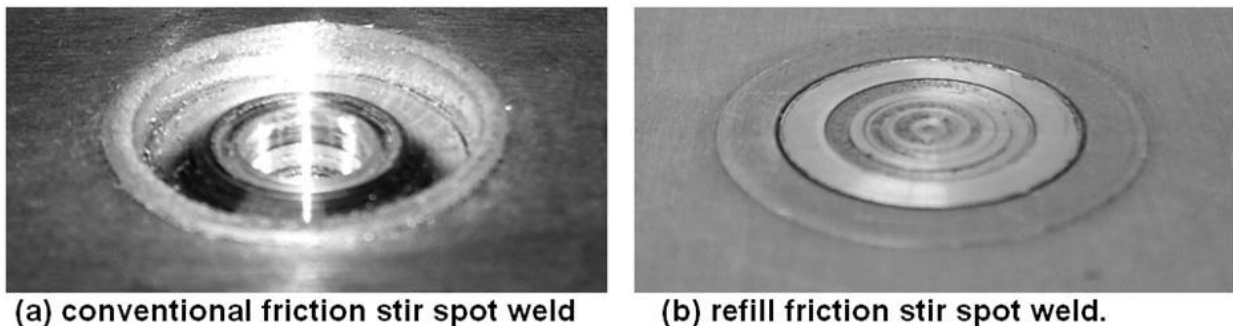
Comparison of the weld surface from conventional (a) friction spot weld and (b) refill friction stir spot weld [36]
